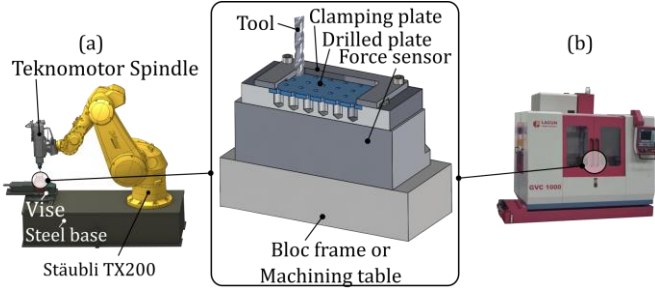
Experimental setup used for Robotic (a) and CNC drilling (b) of Al 6082-T6
